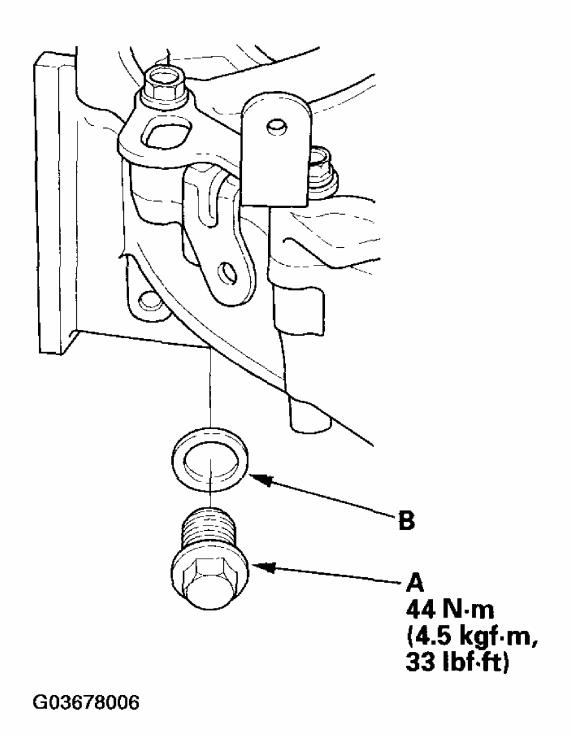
Identifying Tightening Torque Of 20mm Bolt And Washer Courtesy of AMERICAN HONDA MOTOR CO., INC.
